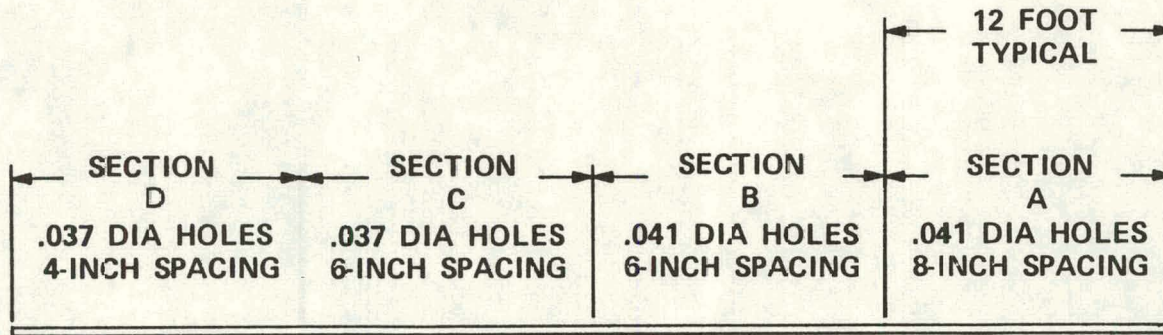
SPRAY TUBE HOLE PATTERN
